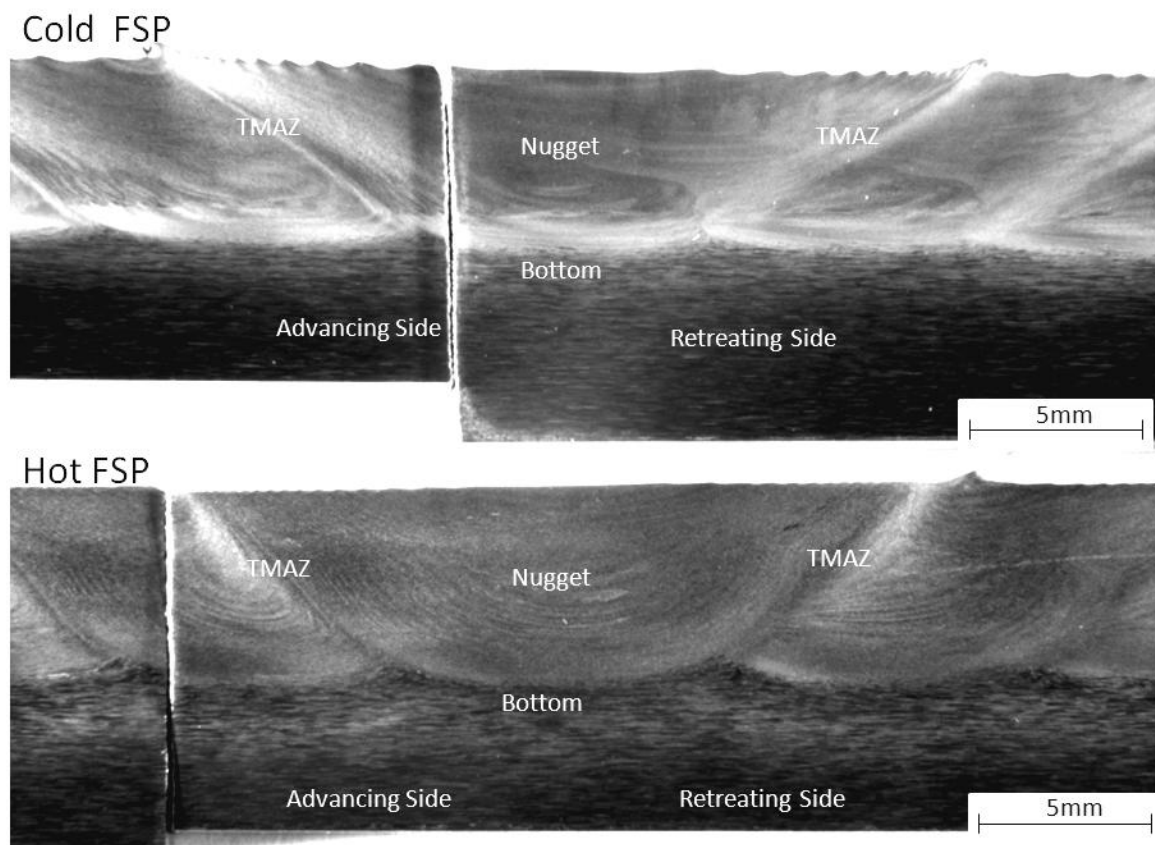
Macroscopic images showing the central weld structures for the hot and cold parameters FSPs, etched using Keller’s to reveal the grain structure taken from a cross-section in the longitudinal plane
